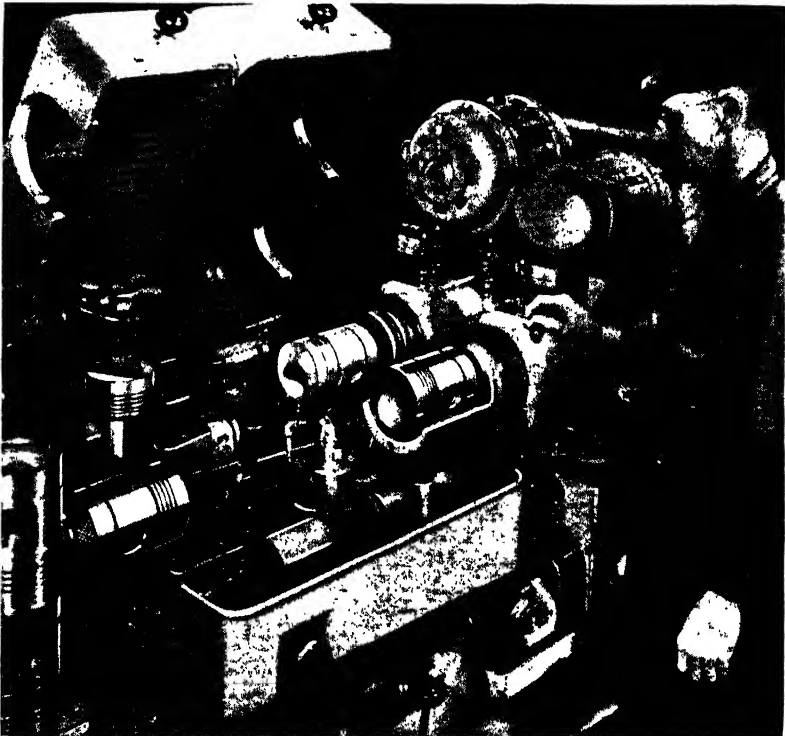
Finish-boring Four Diameters at One Time on a Machine Equipped with a Hydraulically Actuated Tool-head
